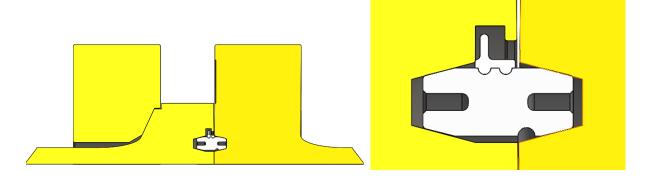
Seal ring and rubber ring inside the flanges (lhs) Figure 14: Close-up (rhs)
